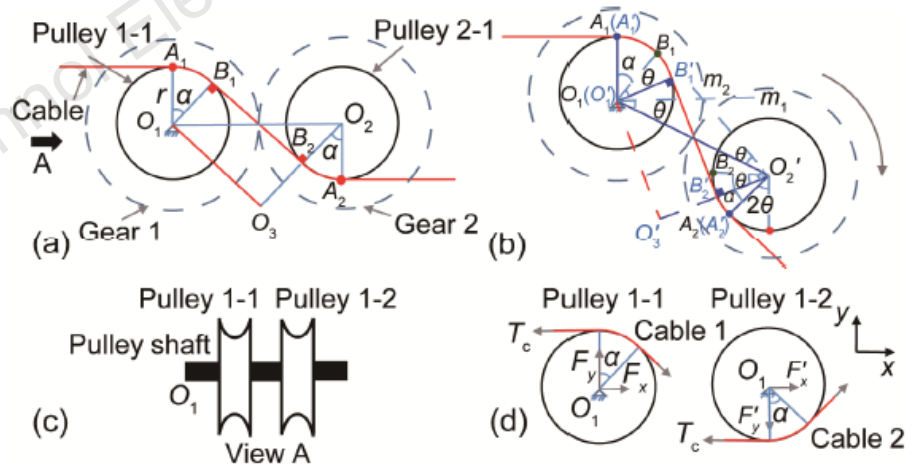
A section view of the pulley assembly, composed of four pulleys (pulley 1-1, 1-2, 2-1, 2-2) and two gears (gears 1, 2) (a), kinematic analysis after gear 2 is rotated around gear 1 with an angle θ clockwise (b), partial view from view A (c), and the force analysis of pulleys 1-1 and 1-2 (d)
